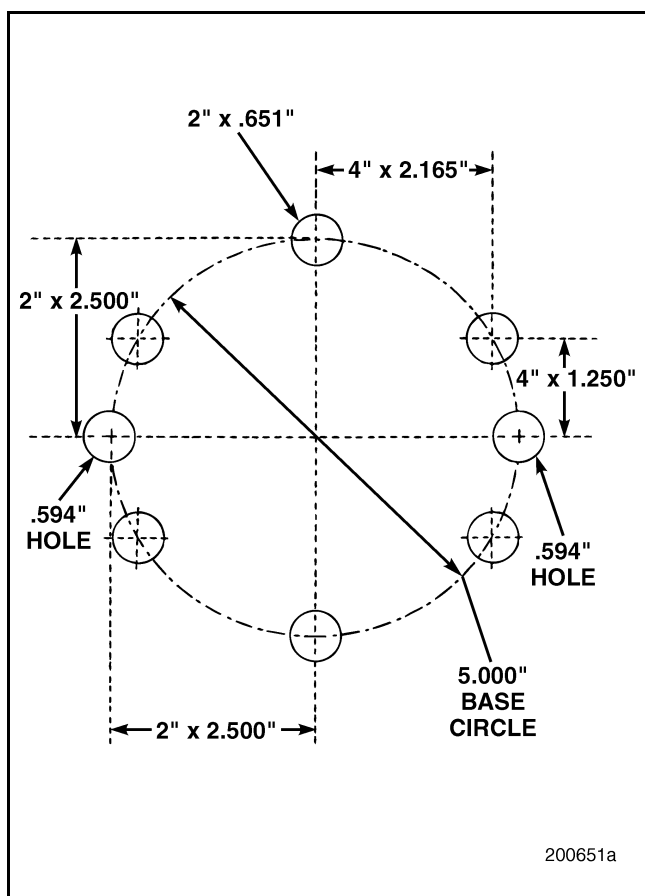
Dowel Pin Hole Dimensions (Flywheel or Torque Converter Drive Flange)
